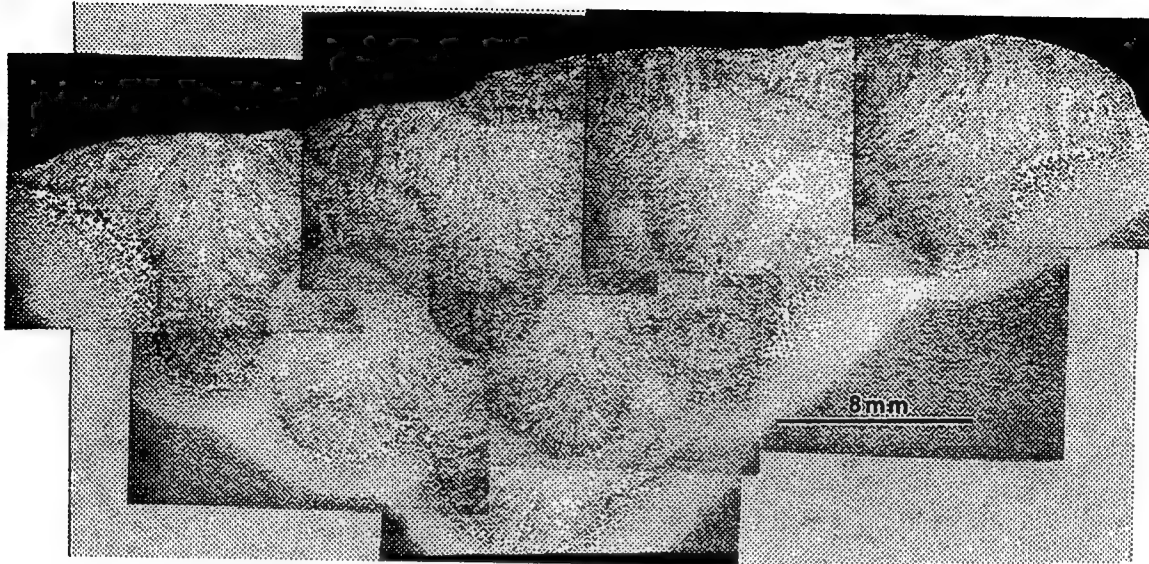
CS2AM Multi-run MIG weld
